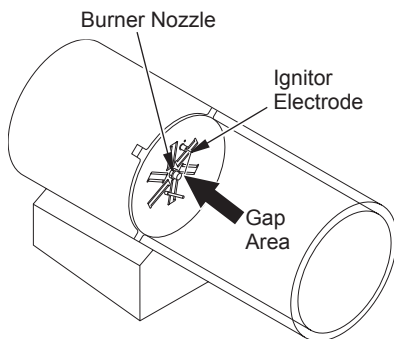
Clearance between Ignitor Electrode and Target Plate
